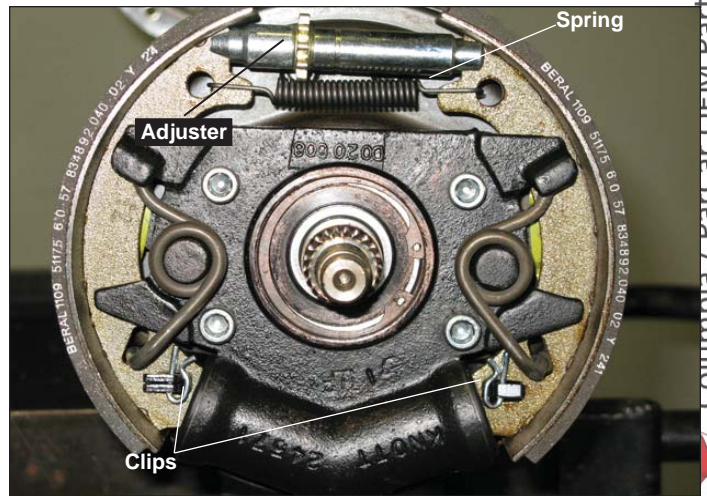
Rear Drum Brake - TEAM Axle Models
